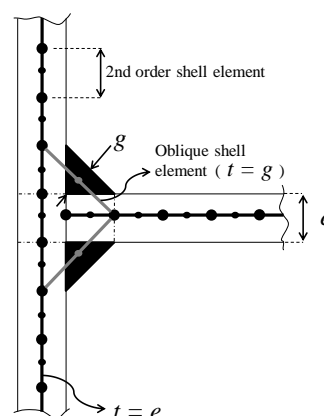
Weld fillet represented by shell oblique elements [adapted from Niemi (1995)].
